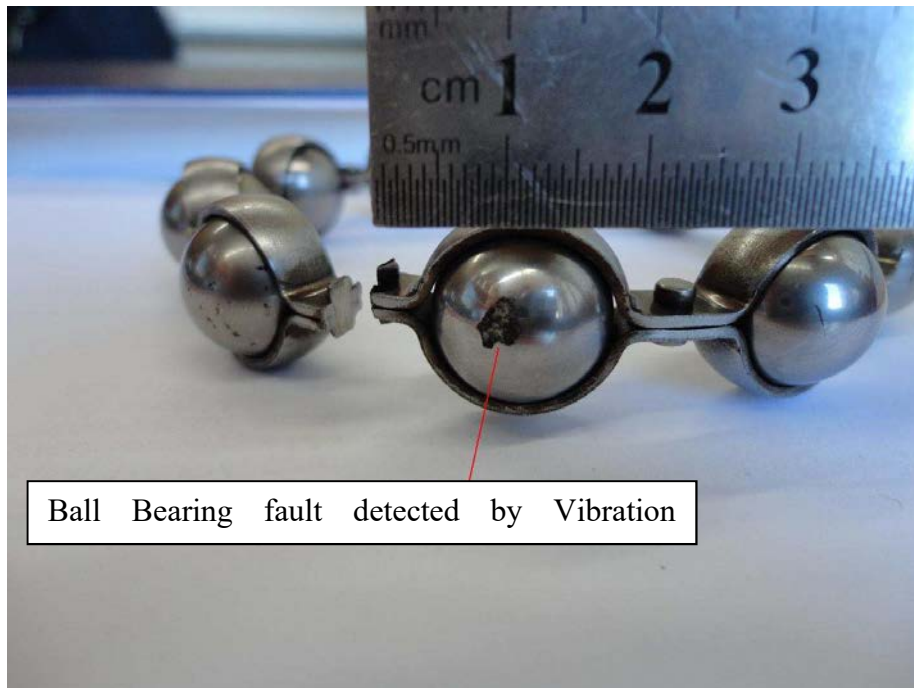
A typical bearing fault identified in a roller bearing at OPAL.
